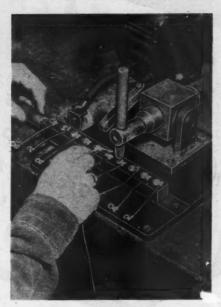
Transformer and special holding fixture has greatly speeded up soldering of dynamotor leads in Small Motor Division, Westinghouse Electric Corporation, Lima, Ohio.
